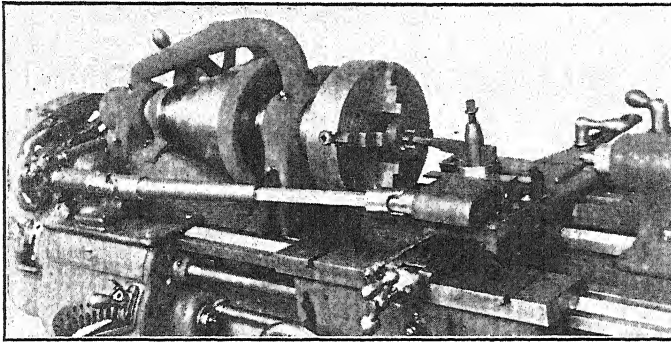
The HendeY Type "C" Relieving Attachment Setup for Inside Relieving a Threading Die.
